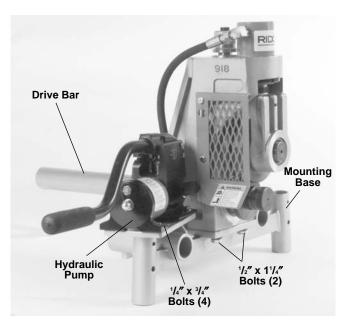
918 Heavy Duty Roll Groover on 1822 Mounting Base
